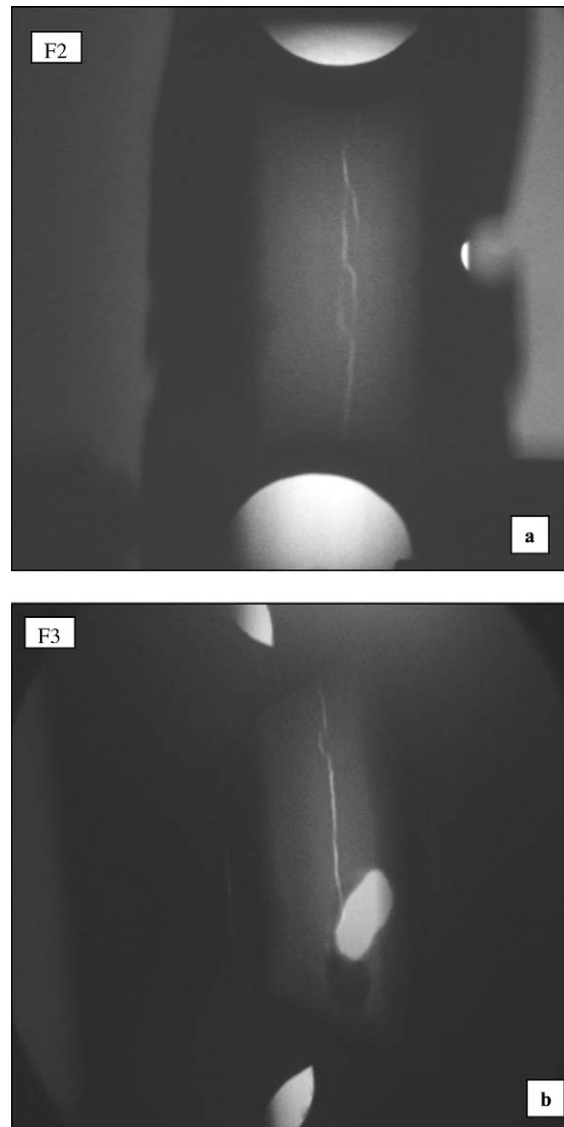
X-ray radiographs of failed bend tube samples F2 and F3 showing long longitudinal cracks along the rolling direction at the center of the bend. The cracks appear stepped with treads parallel to the rolling plane. The large holes appearing in the radiographs (right hand side) are holes punched to drain the water.
